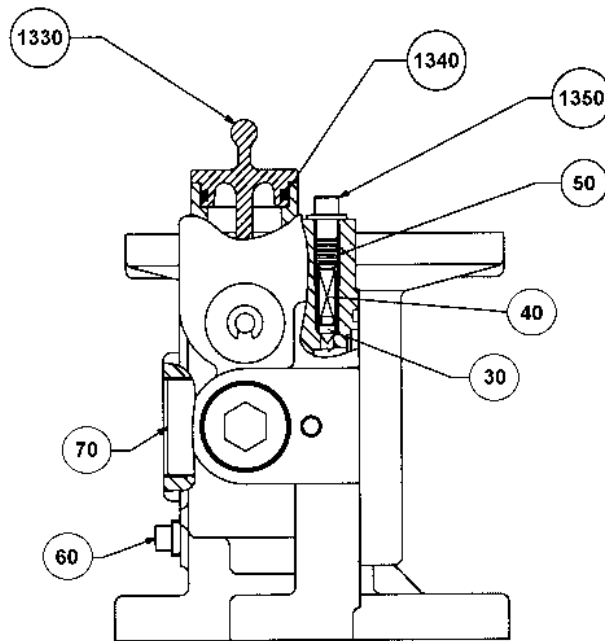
Common Parts - mRoy A & B Side View and API Motor Mount
